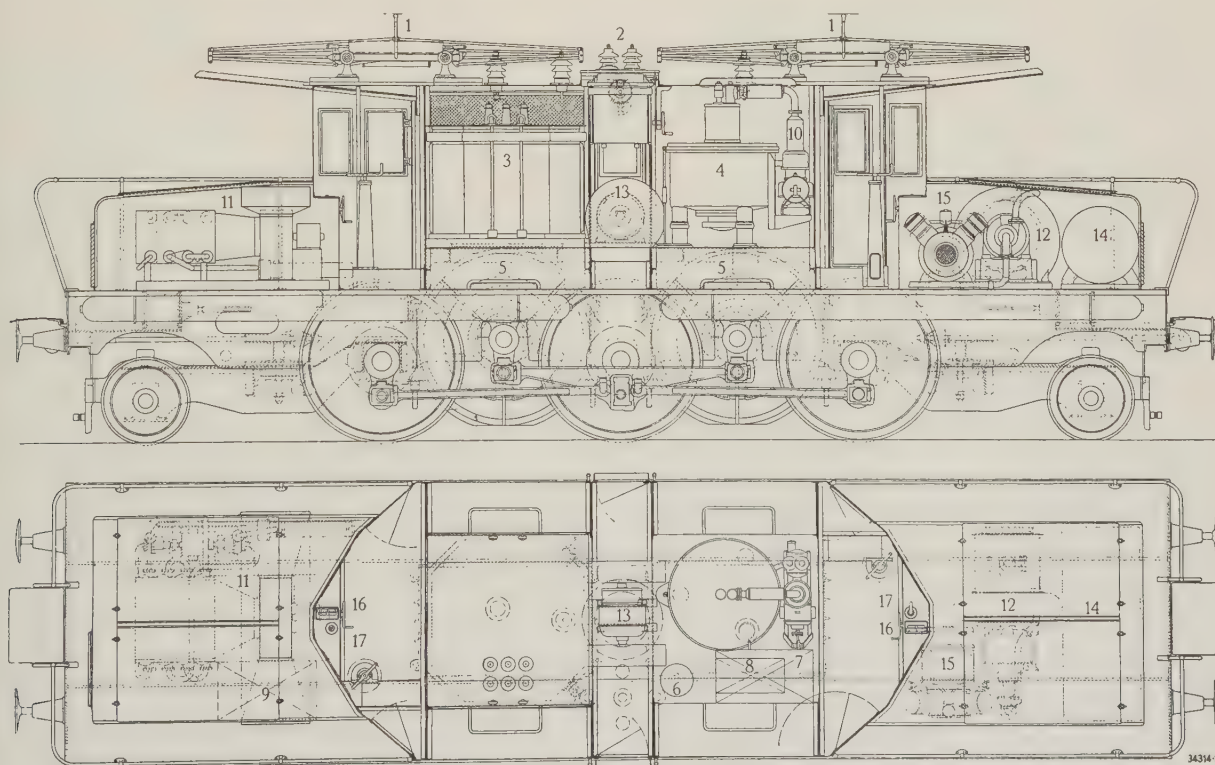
General layout of 1,000-hp single-phase test locomotive with rectifier grid-controlled motors
